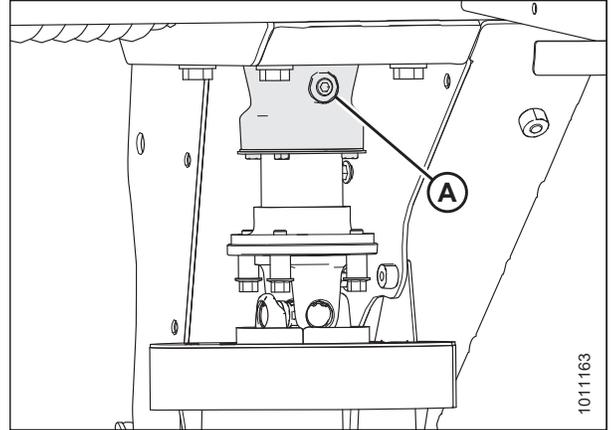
Cutterbar-Conditioner Drive Gearbox (T-Gearbox) Drain Plug
